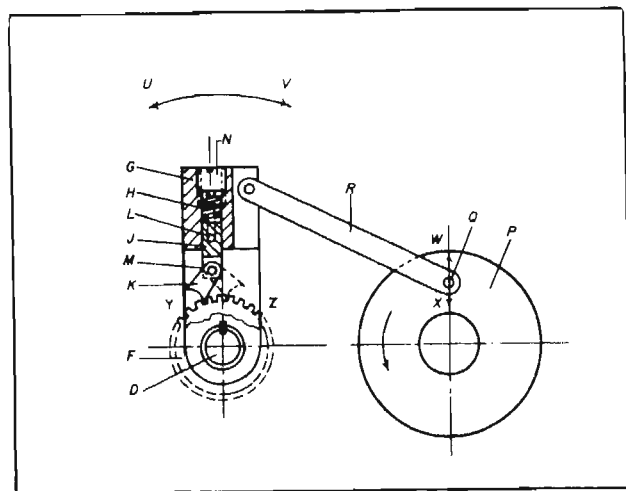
Partial side view of mechanism shown in Fig. 7. Movement of guide head can be varied by adjusting the position of pin Q.
